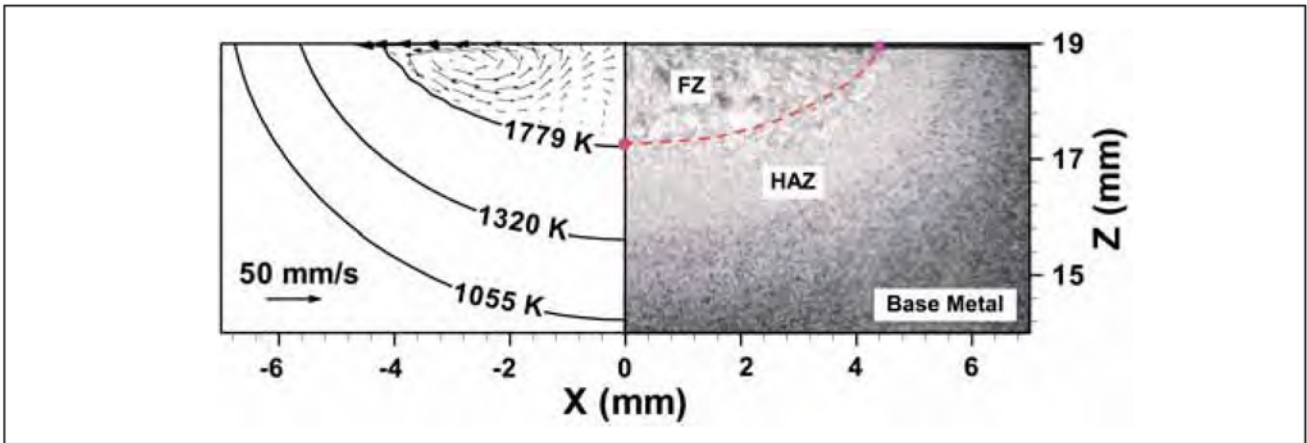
Calculated and measured weld pool geometry during GTA spot welding
